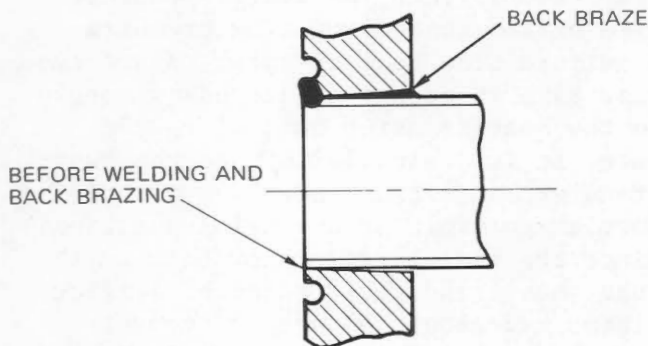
Welded and back-brazed joint schematic.
